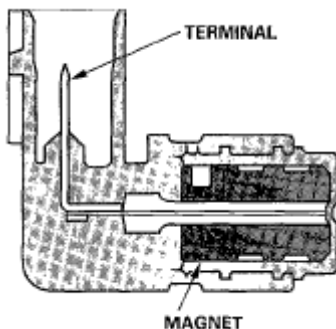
Identifying Terminal And Magnet Of Camshaft Position Sensor
